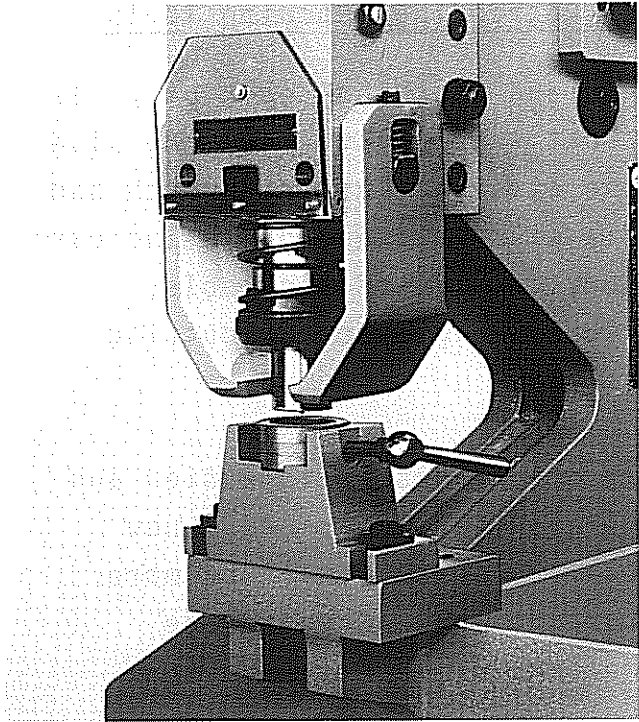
Special punching equipment for punches and dies of up to 40 mm dia.
